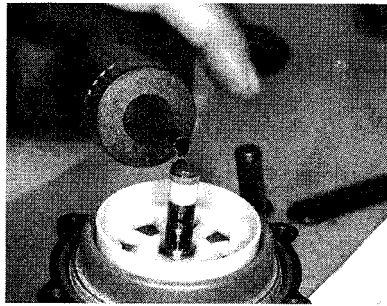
then apply a drop of clean 2-stroke engine oil to the piston seal
